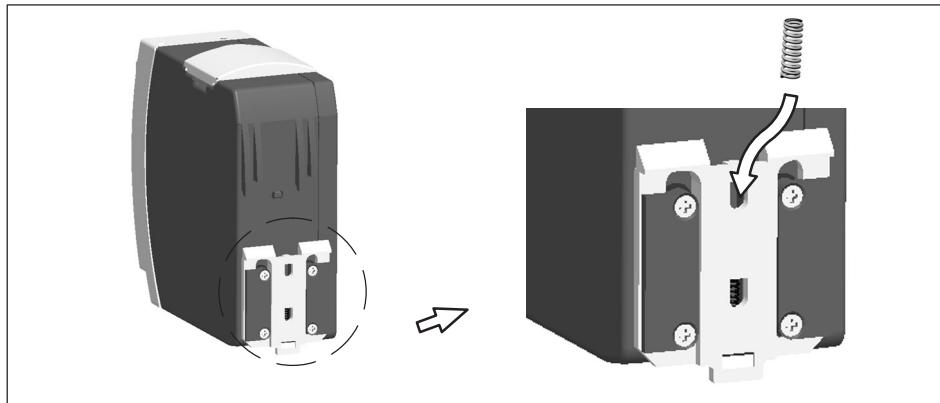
Installing a second spring for more stable mounting of the module on the support rail
